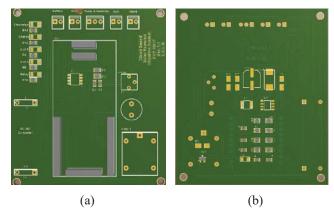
(a) top layer of PCB; (b) bottom layer of PCB
